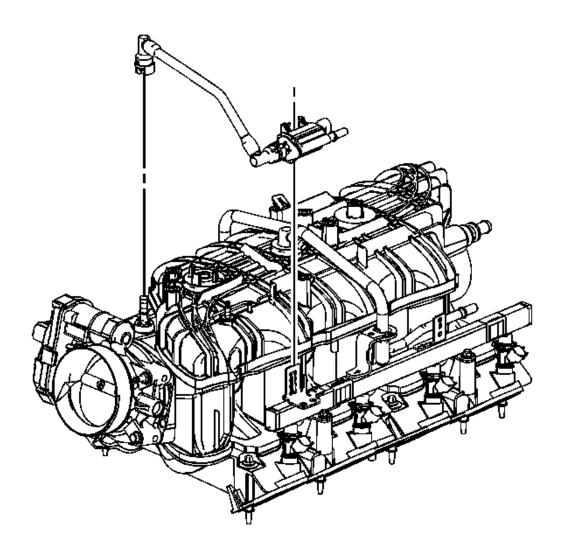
View Of EVAP Tube & Purge Solenoid Courtesy of GENERAL MOTORS CORP.
